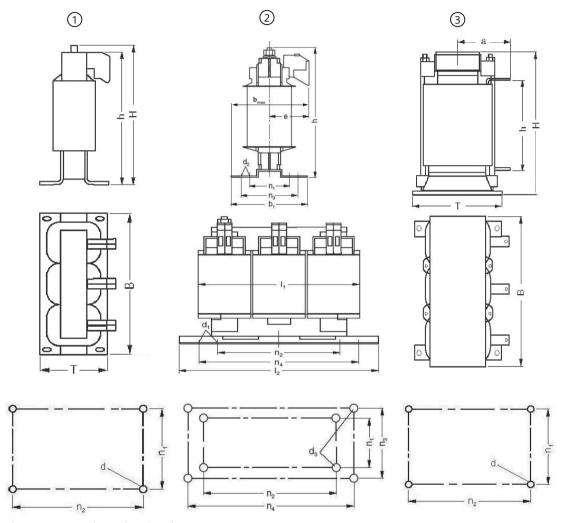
Dimension drawing, motor reactors 3 - 30 A
